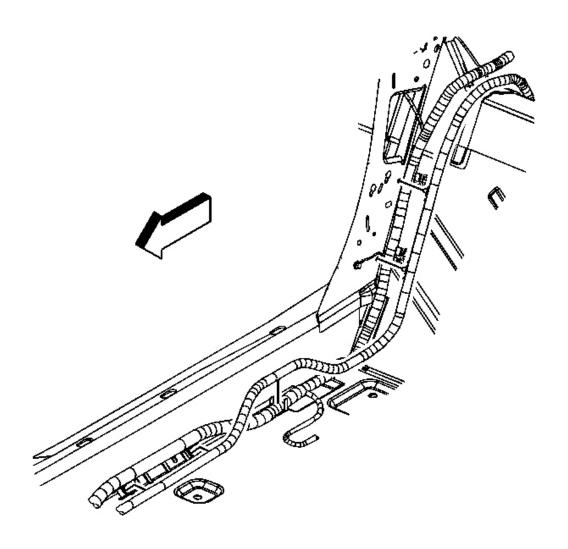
View Of Positive Battery Cable Retainers Courtesy of GENERAL MOTORS CORP.
